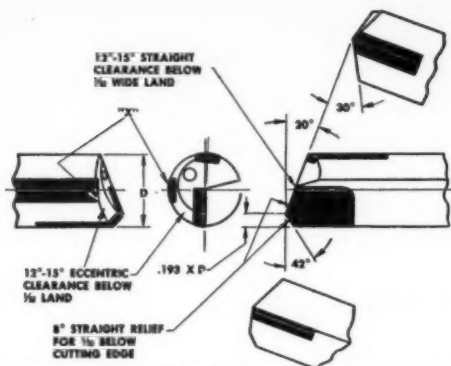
Cutting and relief angles for carbide all-depth drills.
